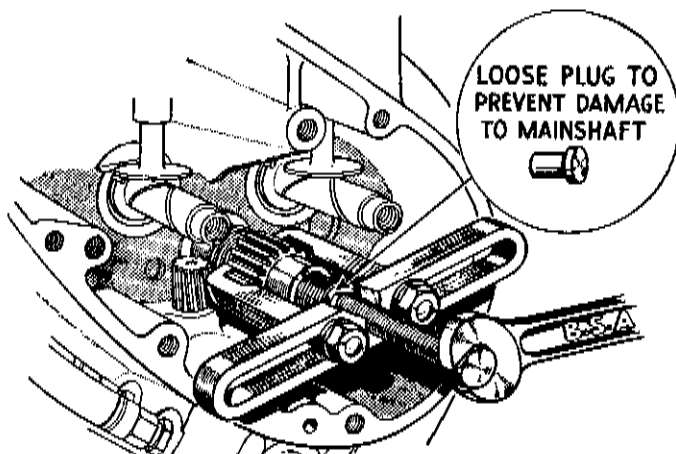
Engine Shaft Pinion Extractor 61-3256
